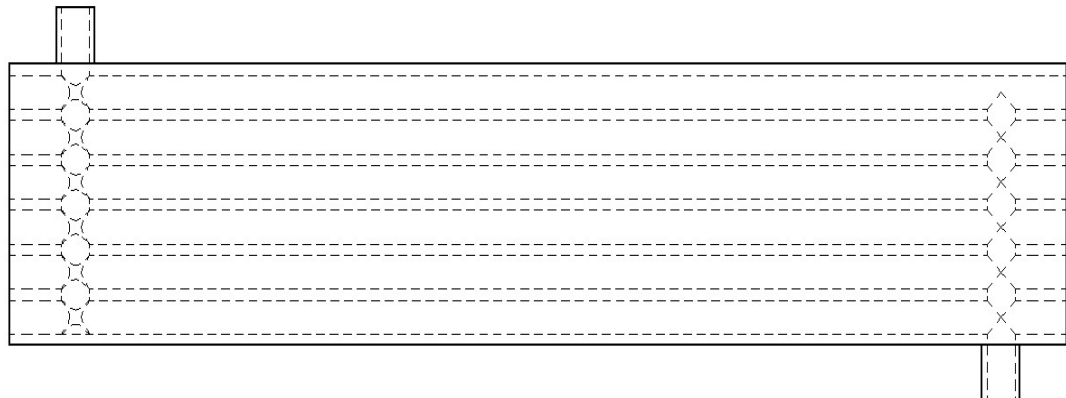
Showing a schematic diagram of the channel tubes layout in the designed flat plate heat exchanger.
